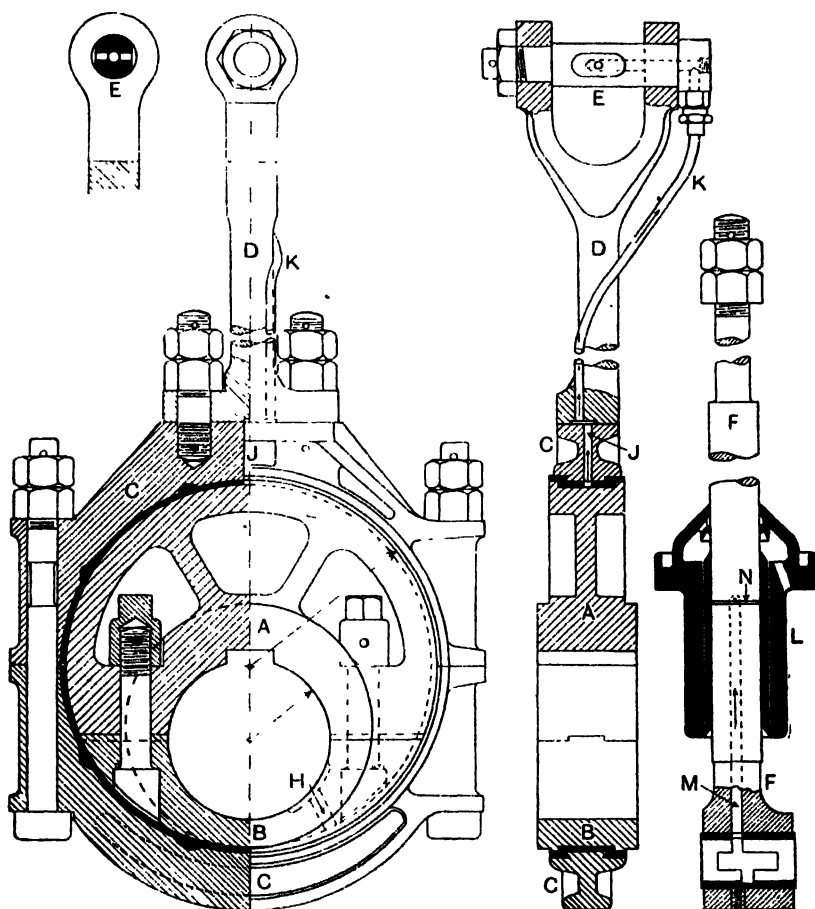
Eccentric, eccentric rod, etc., of Allen engine.
